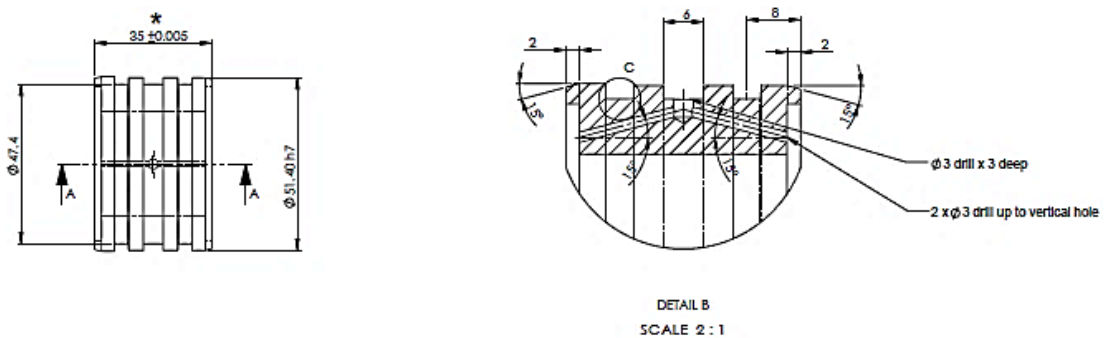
Outer Spacer for the Rear Bearing Arrangement for the HSPM Generator
